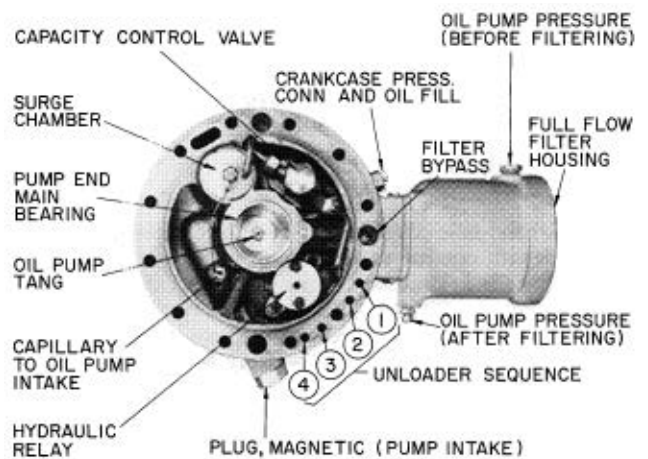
5H120 and 126 Pump-End Bearing Head
